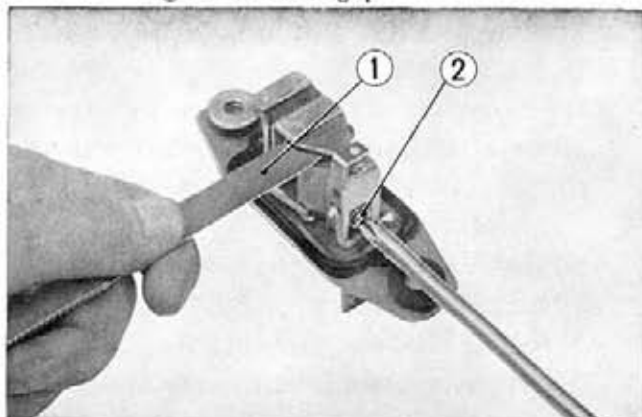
① Thickness gauge ② Core gap adjusting screw
